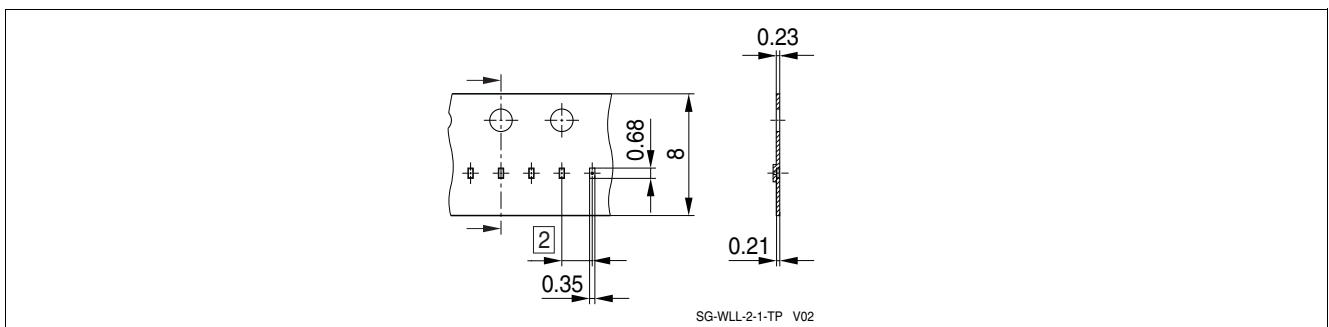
WLL-2-1 Packing (dimension in mm)
